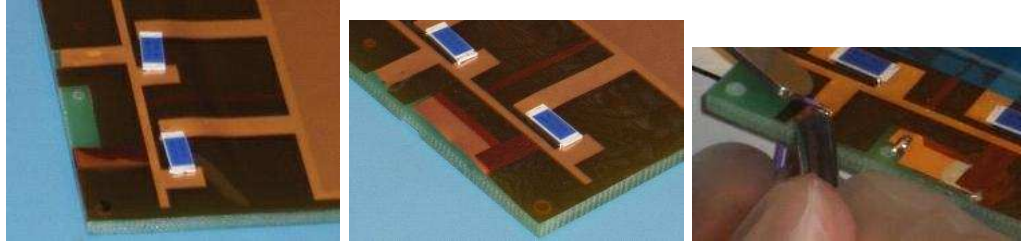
Cutting of the kapton foil (Left), placing and glueing the copper strip (Middle), soldering the high voltage cable on the strips (Right).
